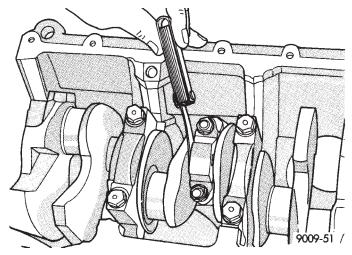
Checking Connecting Rod Side Clearace— Typical
